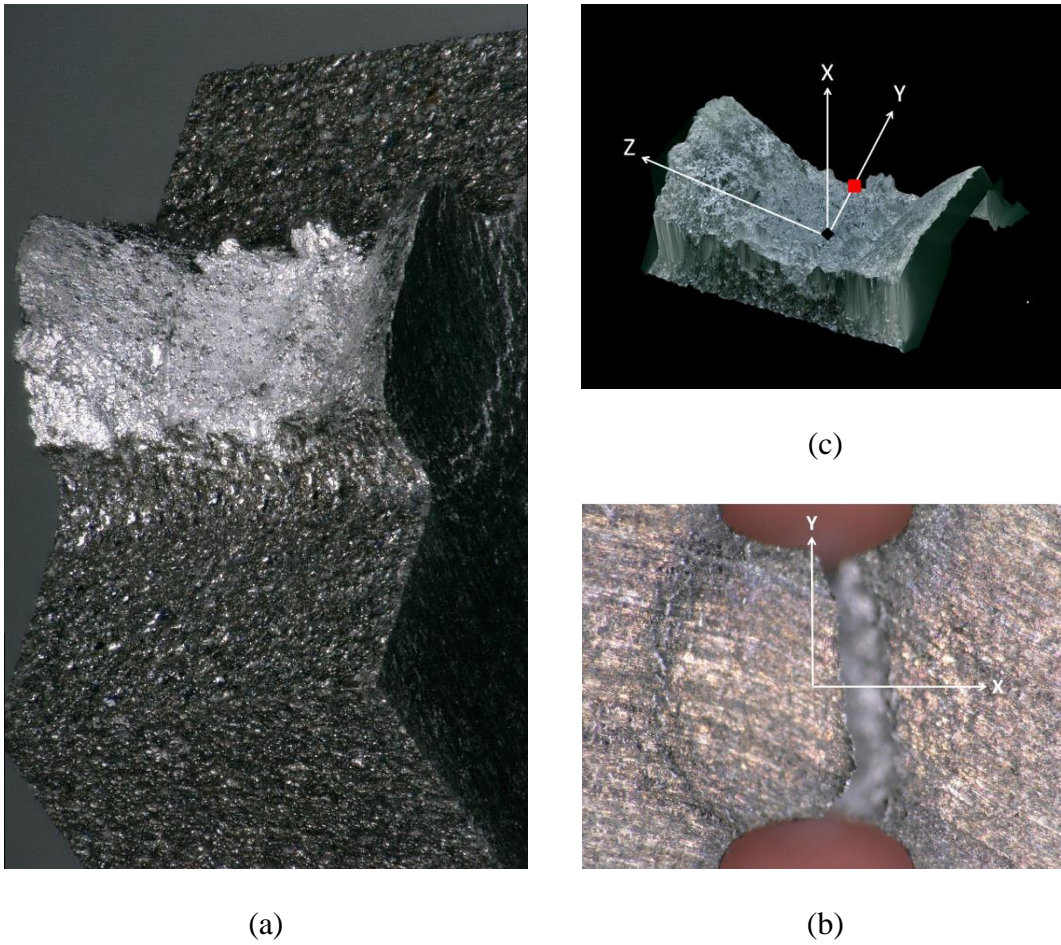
Fracture Surface of Specimen S1: (a) oblique angle view of fracture at notch (b) specimen X-Y axes on surface view (c) X-Y-Z axes at fracture surface midplane with measurement Point C₀ (◆) and Point N₀ (■).
